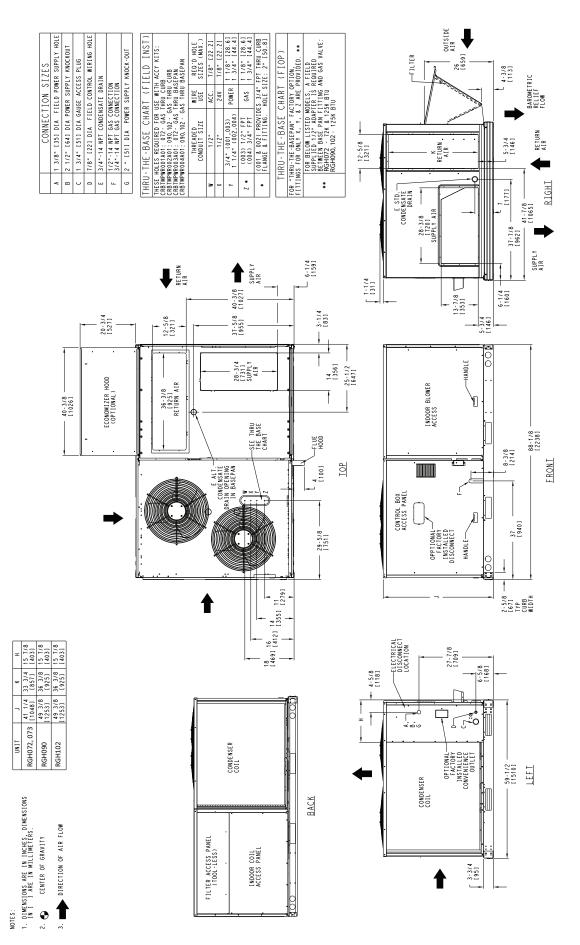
Unit Dimensional Drawing — Sizes 072-102
